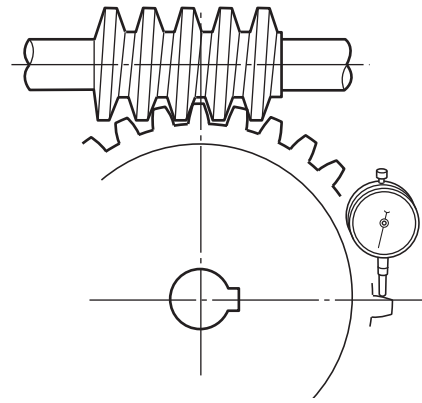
Method of measurement for Worm gear pair (Circumference direction)
